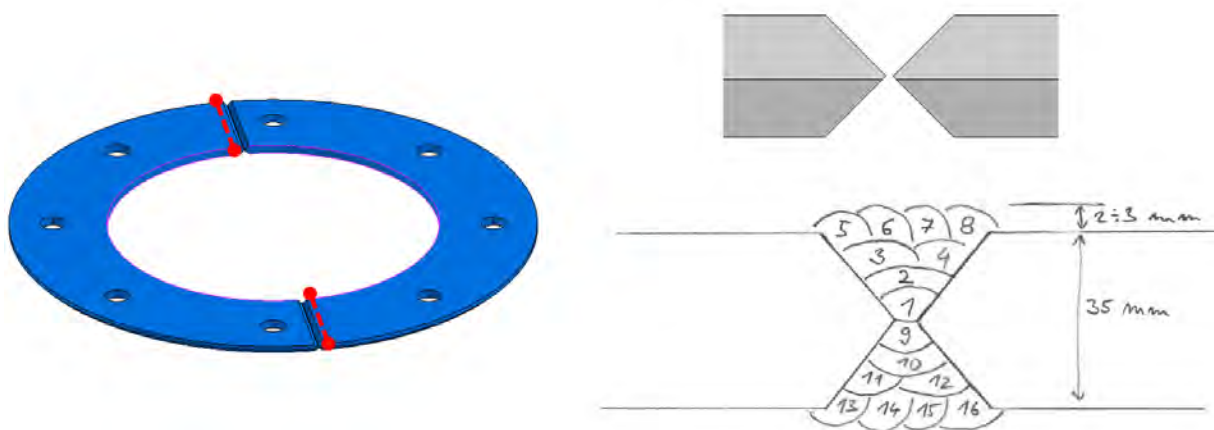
The welds for connecting 2 parts of annulus, the corresponding bevel shape and layout of weld passes
